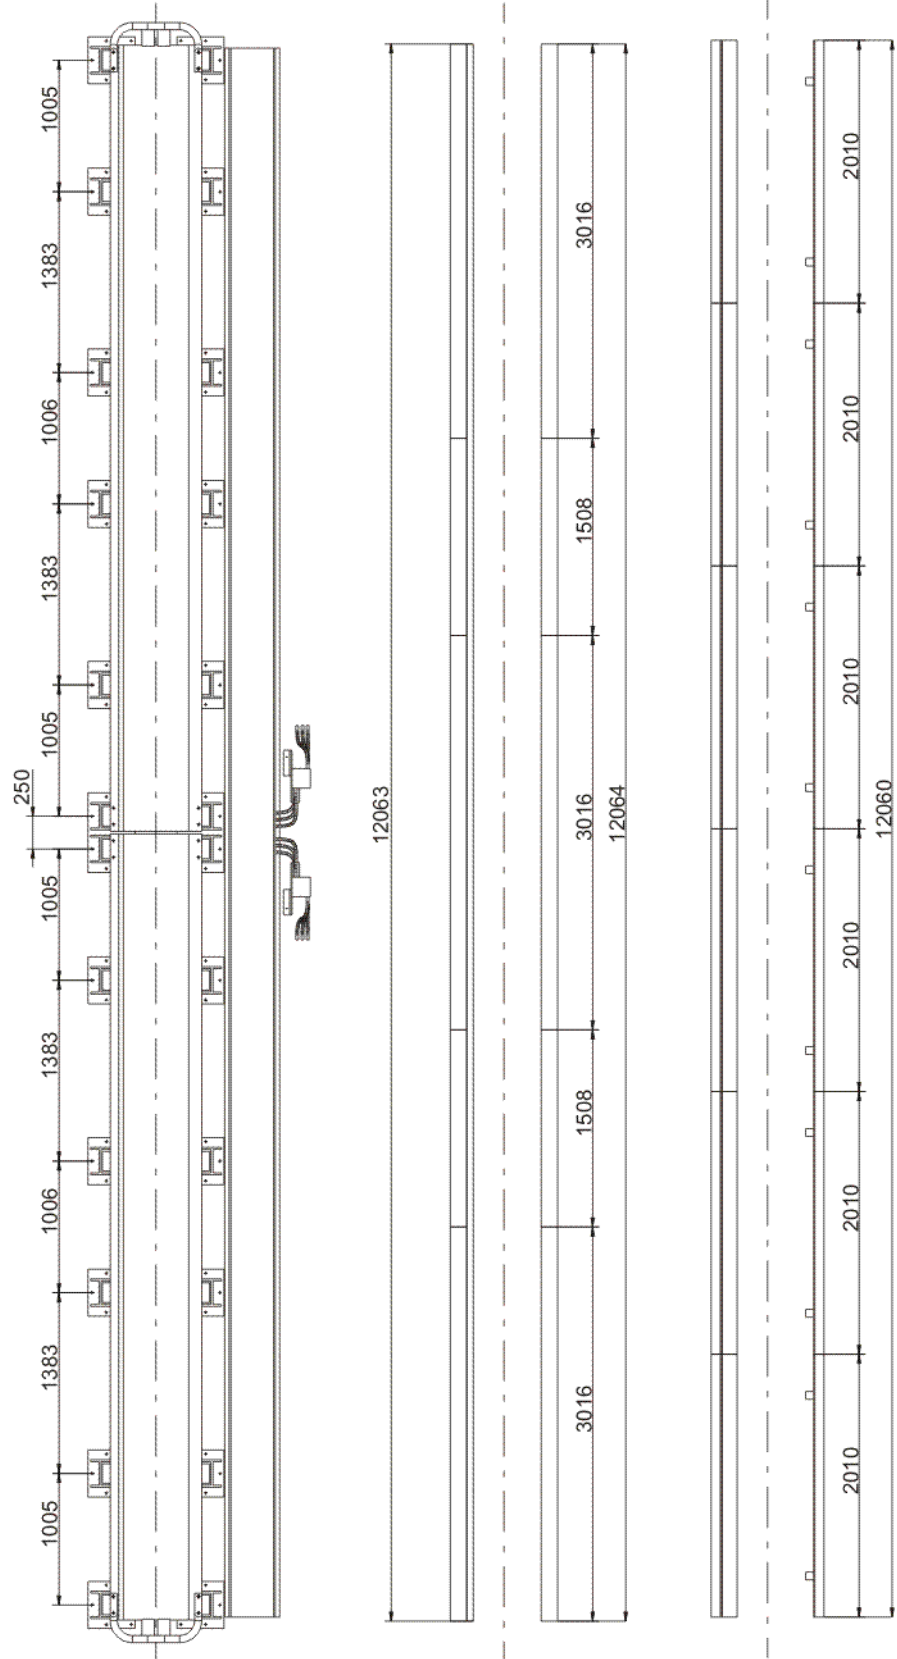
Mounting bases, racks, covers; serial no. 141215
